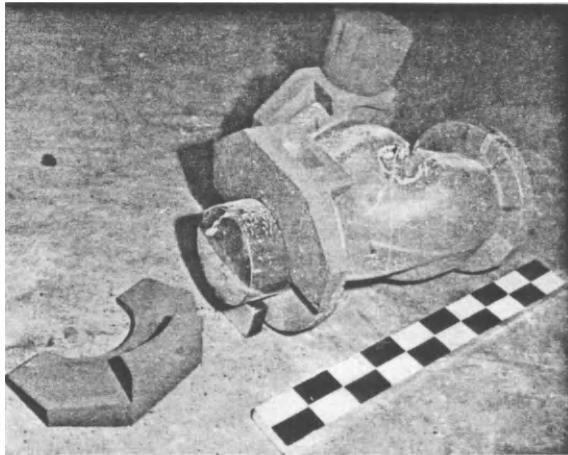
b. Tapered exothermic pads, combined with breaker core, on a gate valve casing.
